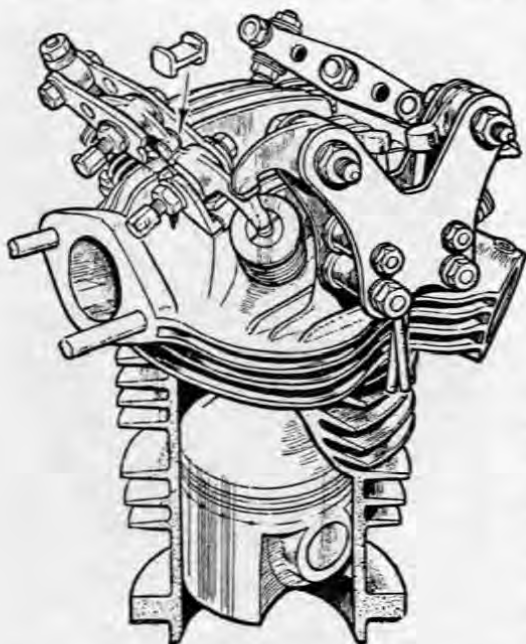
Actuation of four radial valves in the cylinder head with hemispherical combustion chamber of a motor-cycle engine.
